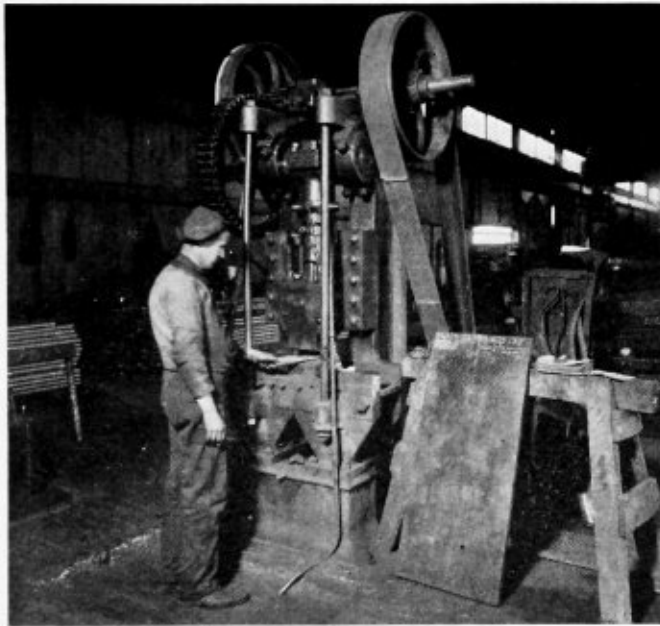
Crushing the End of a Tube, Weld Being Held at the Side. This Test Discloses Imperfectly Welded Tubes, Which Are Scrapped
